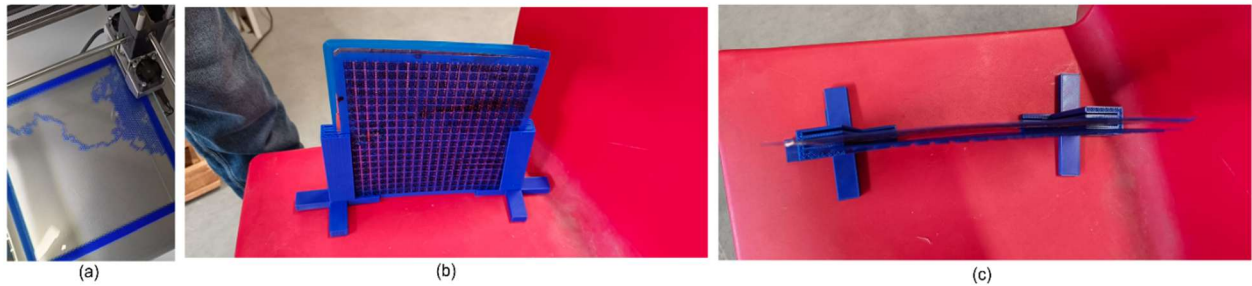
(a) 3-D printing fabrication process. Photograph of the fabricated prototype: (b) side view, (c) top view.
